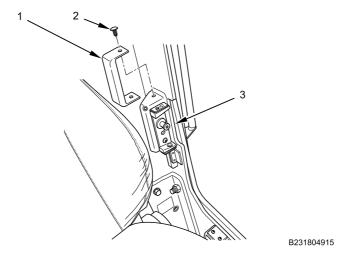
Cabin Door Striker Tapping Plate Cover Removal.
